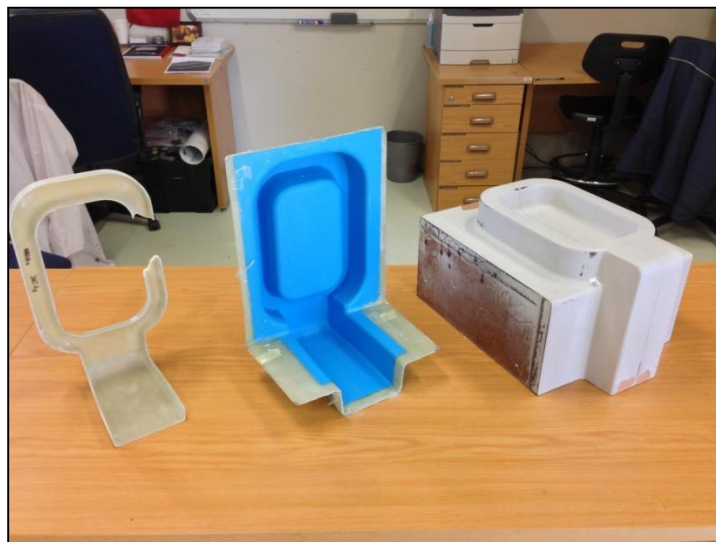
From left to right: final trimmed part, tool and pattern for the fore rib of the ventral fin
